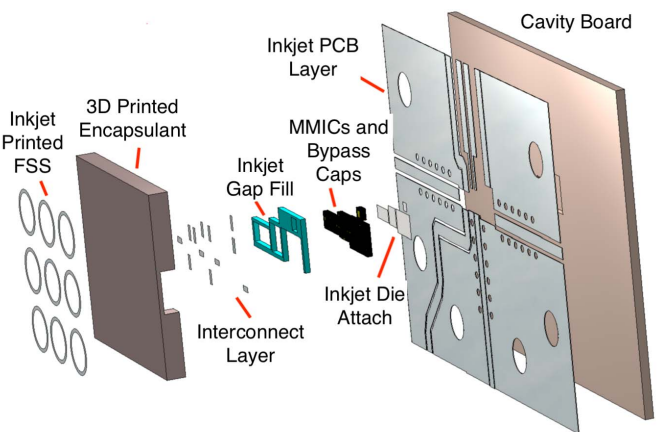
Exploded view of the complete encapsulated RF front-end MCM, showing the multiple layers that were additively manufactured.
